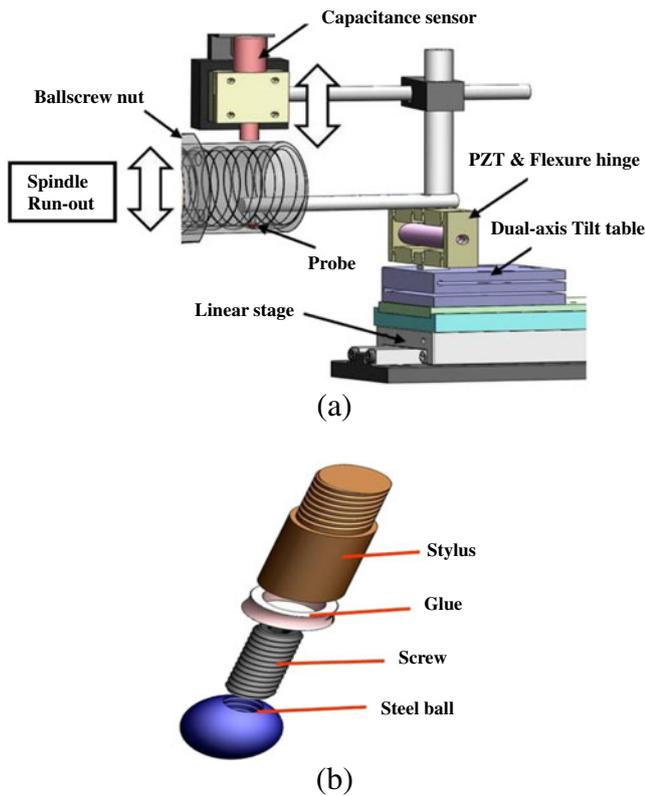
Schematic of run-out compensation, a the measurement system and b the probe assembly
